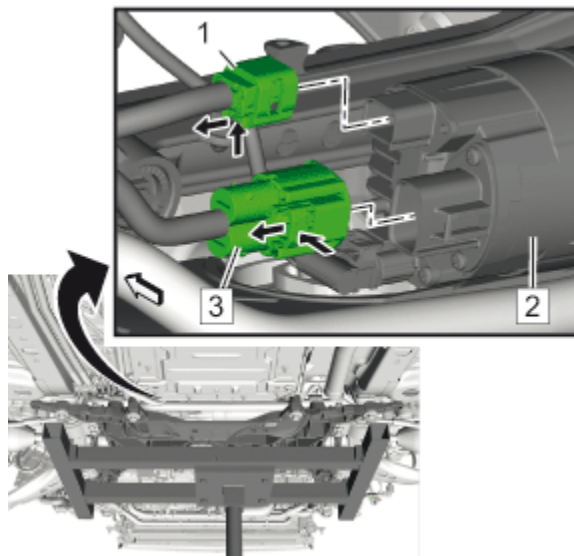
Power Steering Assist Motor And Electrical Connectors
